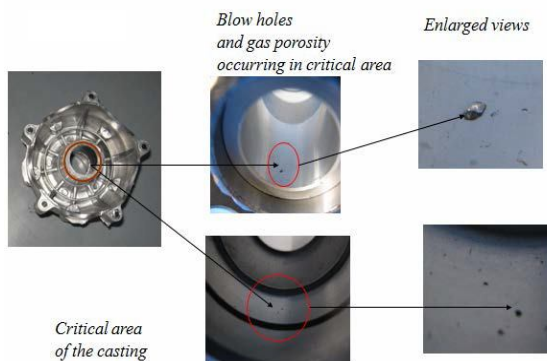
Blow holes in 'Front Wheel Hub I casting'
